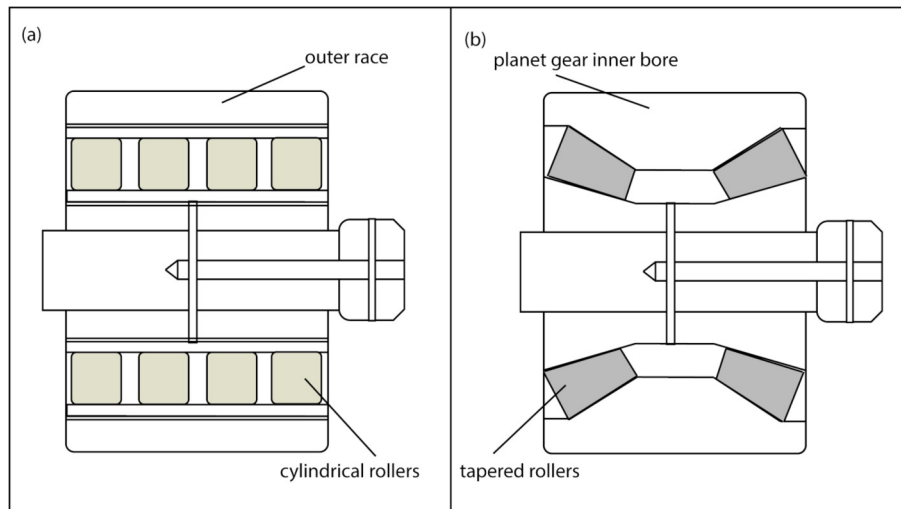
The schematic description of (a) conventional four row cylindrical roller bearings, (b) new integral dual row tapered roller bearings.
